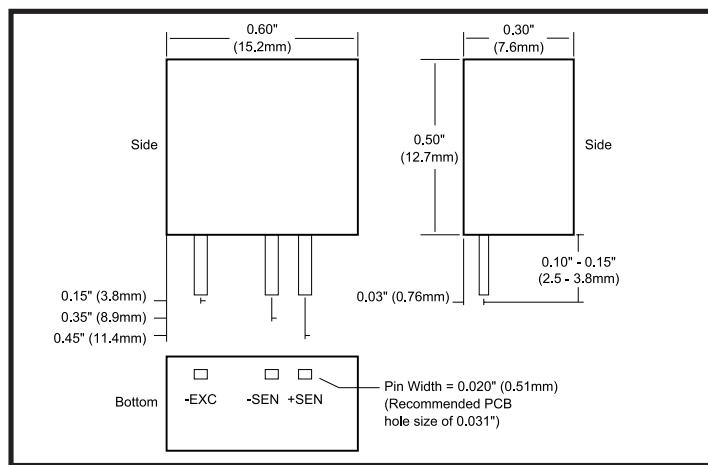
SCMXCJC Physical Dimensions and Pin Layout
